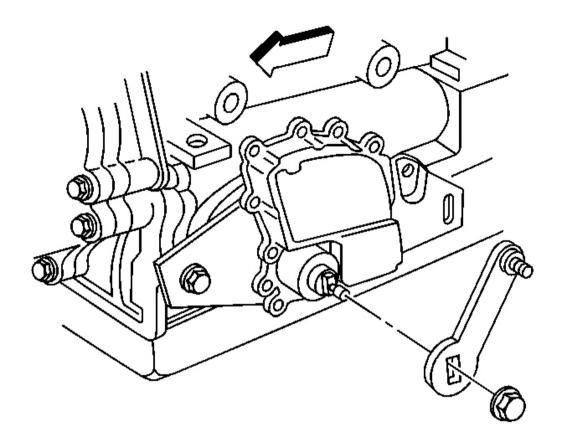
Range Selector (Shift) Lever & Nuts Courtesy of GENERAL MOTORS CORP.
